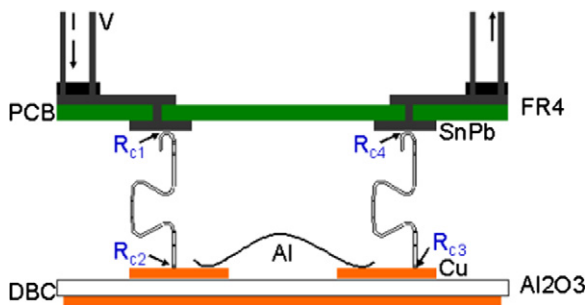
Schematic overview of the spring contact system. PCB connected to DBC by springs.
